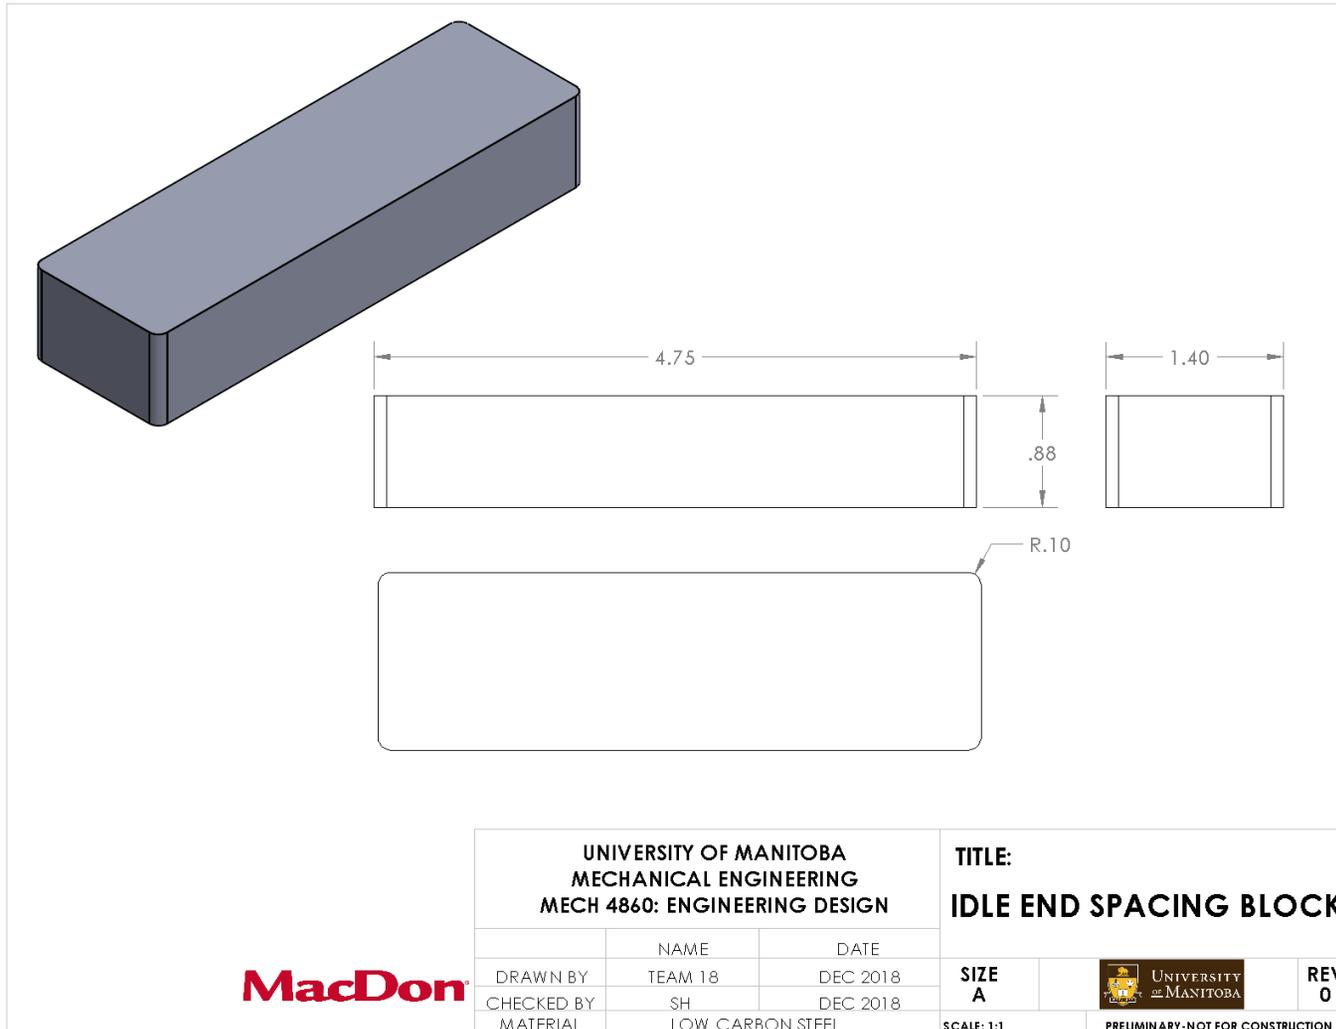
Preliminary Drawing for the Idle End Spacing Block
